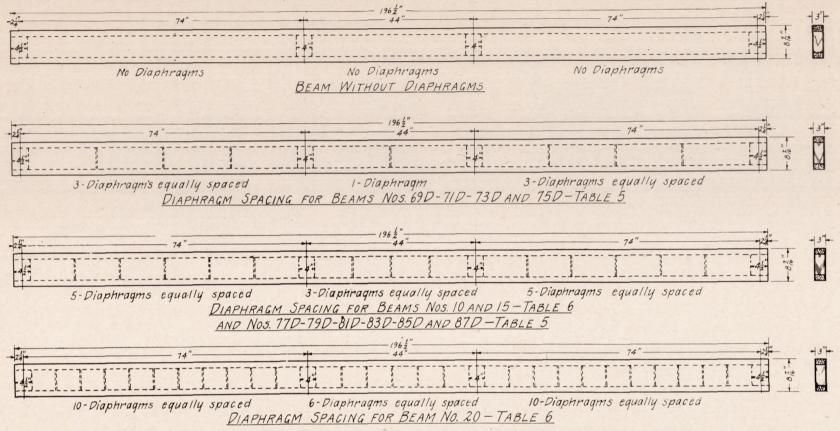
Design of beams approximating the mid-section of the Navy BS-1 box beam, showing various diaphragan spacings used
